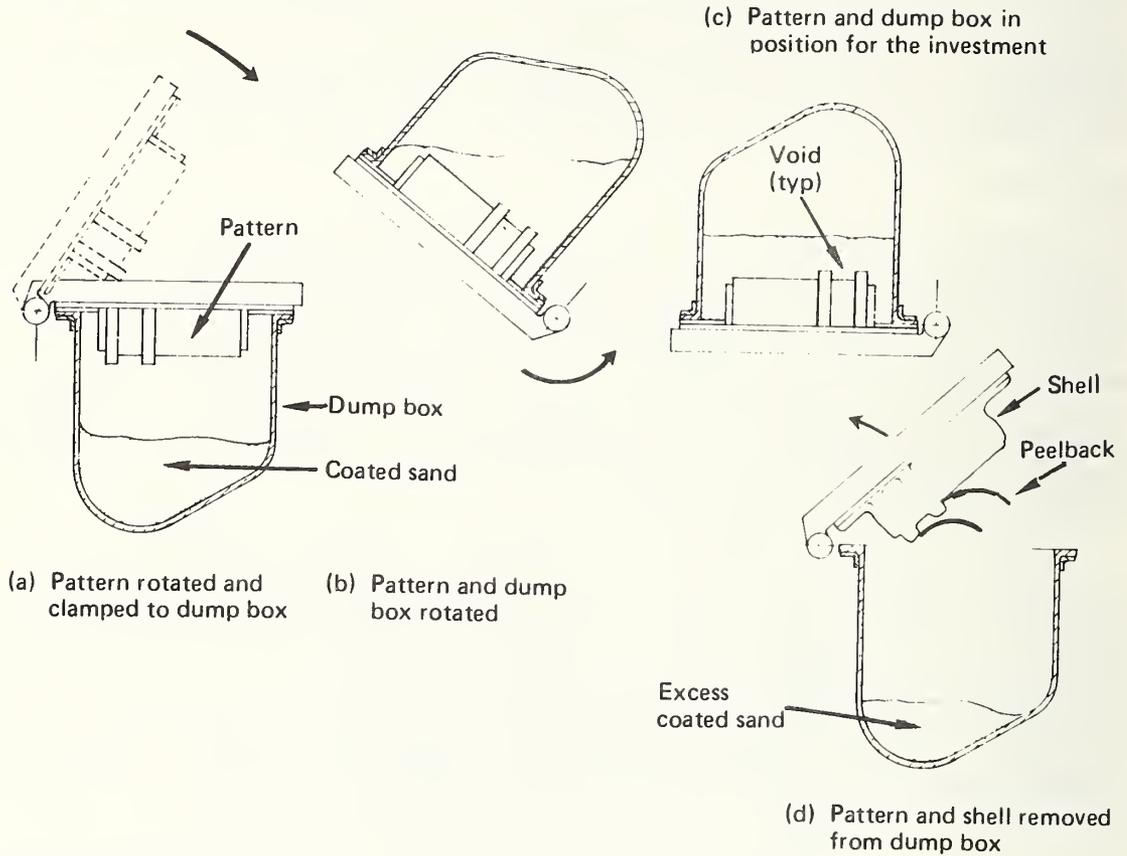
DUMP BOX METHOD OF MAKING A SHELL MOLD
